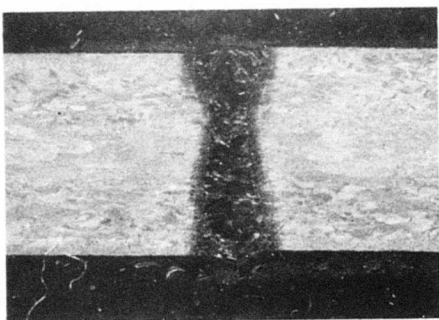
WELD CROSS SECTIONS (TITANIUM ALLOY) TEST
